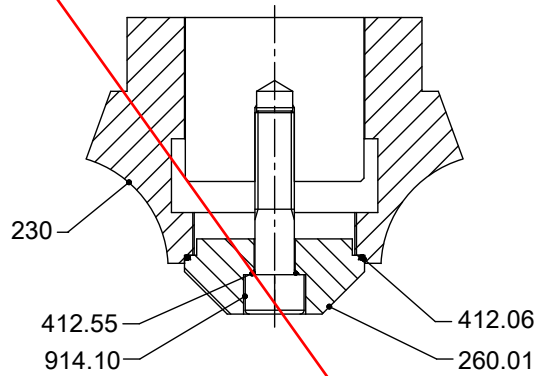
Impeller fastening elements M100 × 2 (for hydraulic systems K 500-632, K 500-640)
